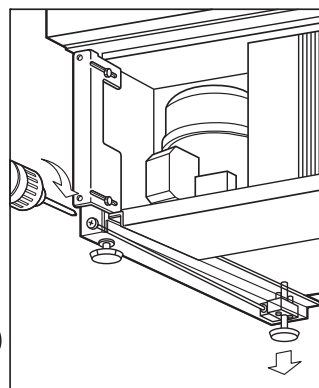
shows side molding installation for tall units. Installation of the side molding for base units is the same. For installations where units are side by side, refer to Dual Installations on page 21.
